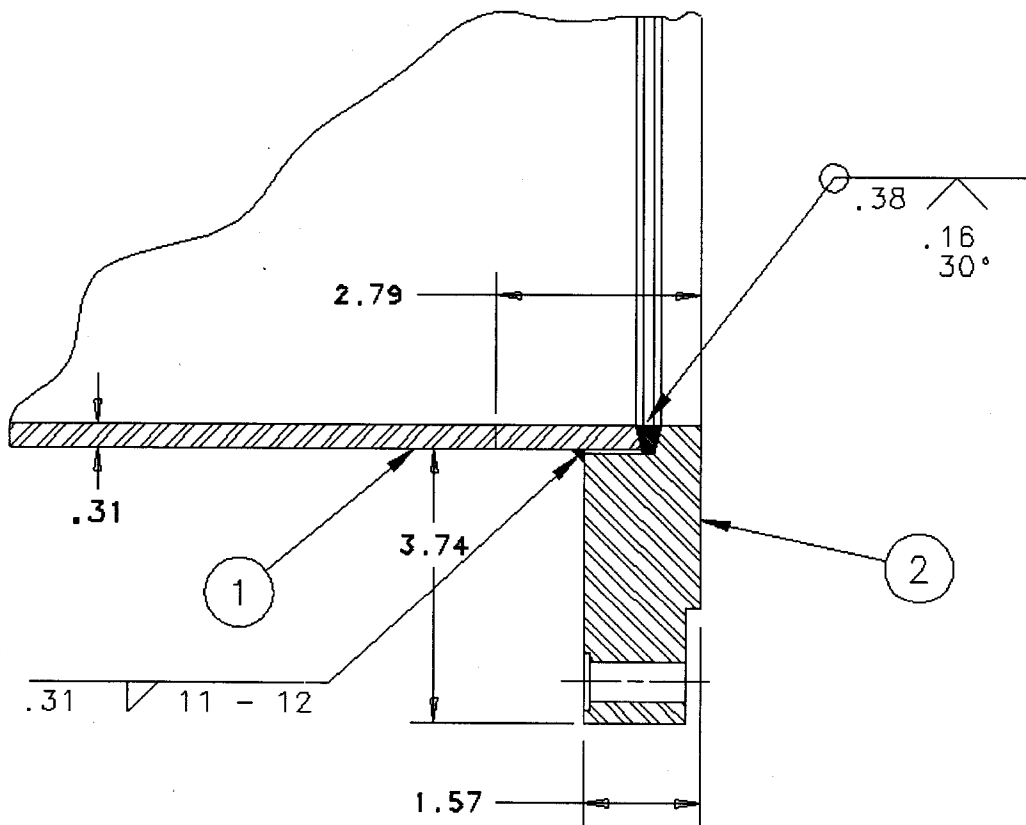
, The cross-section view of the end flange with the vessel shell, also refer to detail L of drawing ME-439317, and drawing MD-439240..
